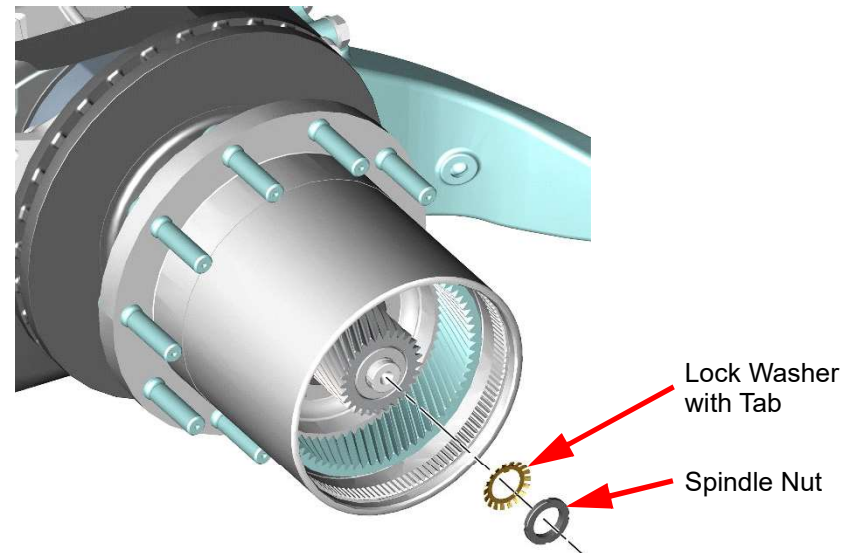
Hand Tightening the Spindle Nut Using a tab bending tool, bend over a lock washer tab.
